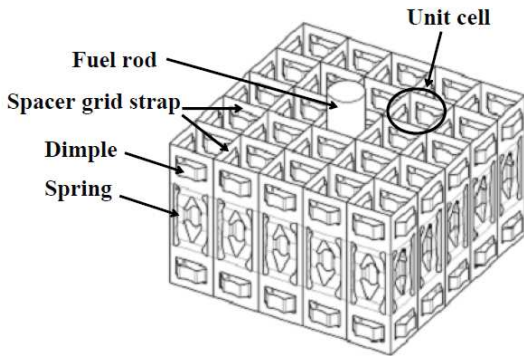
Spacer grid assembly with fixed fuel rod supports
